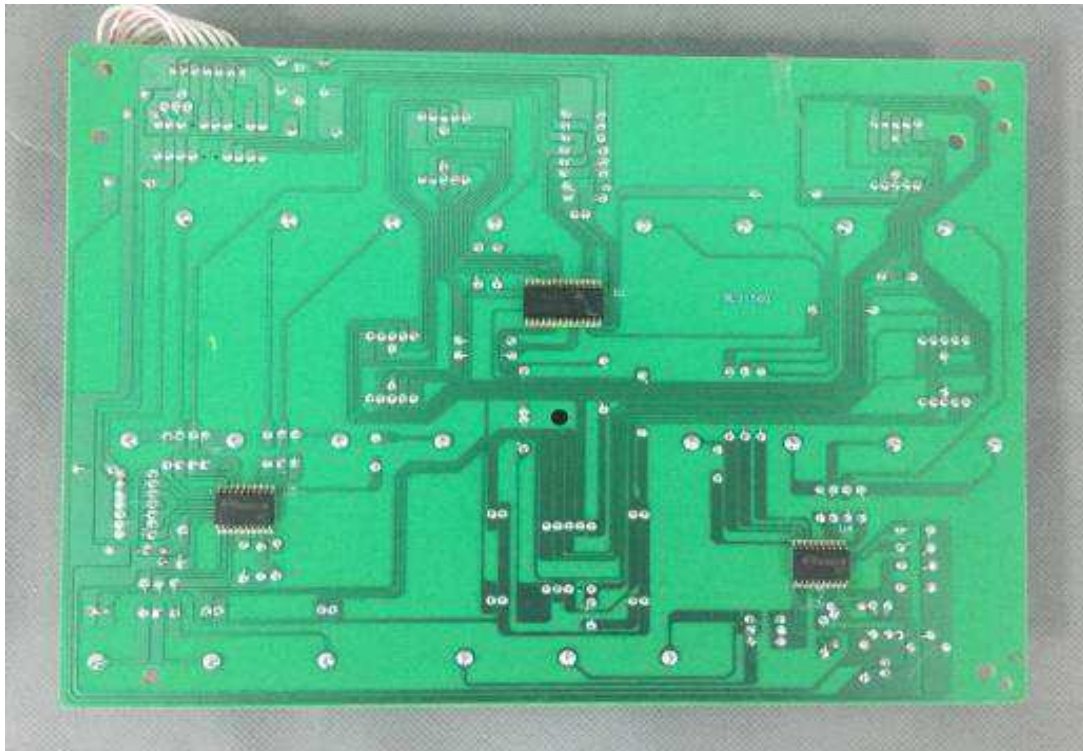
Optional internal view of C74E Power PCB 02 (top)
